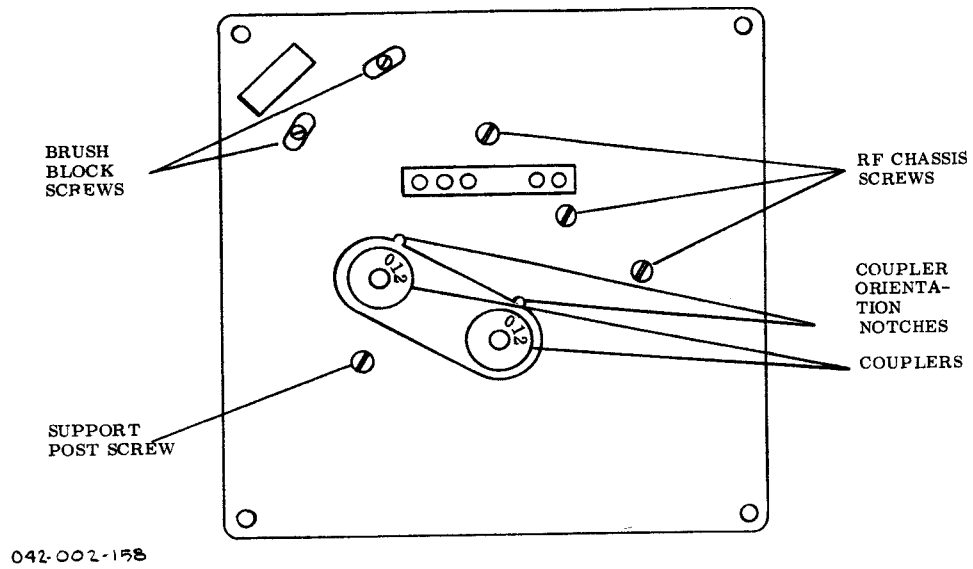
RF Amplifier Assembly A2A4, Bottom View, Disassembly Screw Locations
